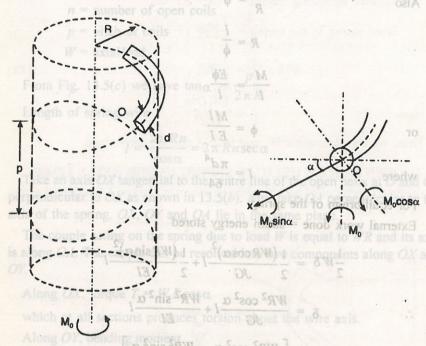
Open coiled helical spring subjected to axial torque  $M_0$ Let  $\beta$  = angle through which the free end rotates
